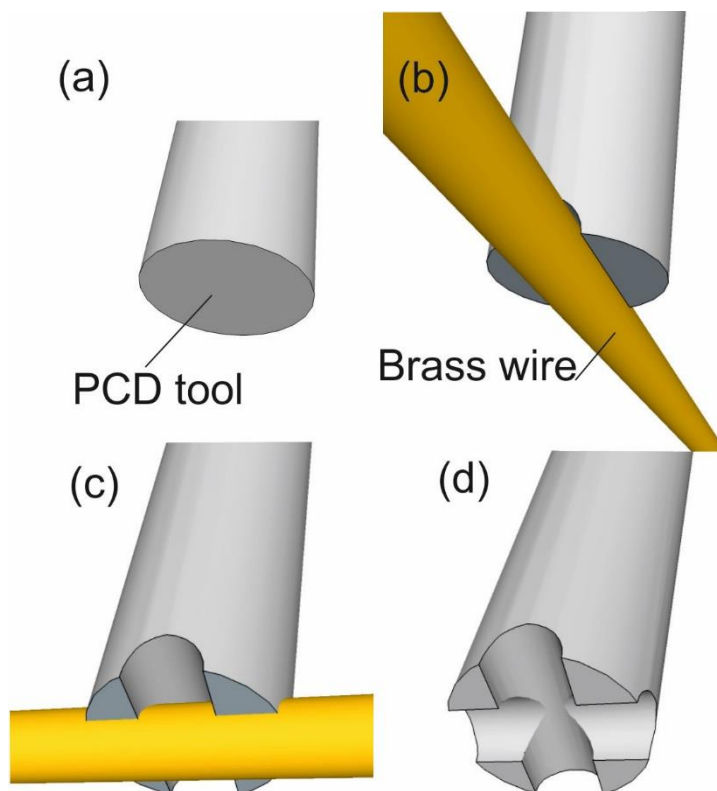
Schematic of fabrication of tool with teeth (a) Starting PCD small tool (b) First cut with tool stationary (c) Second cut with tool stationary (d) Finished tool
